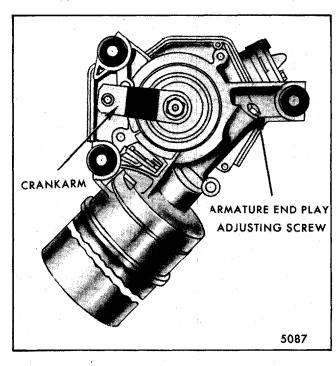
Wiper Motor and Crank Arm in Park Position
